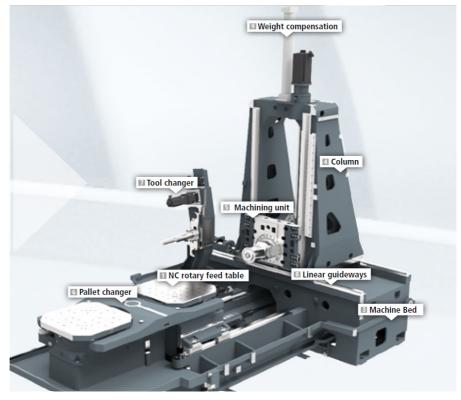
Components of a horizontal machining centre – Heller H8000MC Source: Gebr. Heller Maschinenfabrik GmbH
